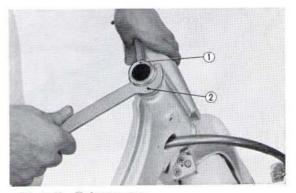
(1) Steering stem (2) Steering stem nut wrench
